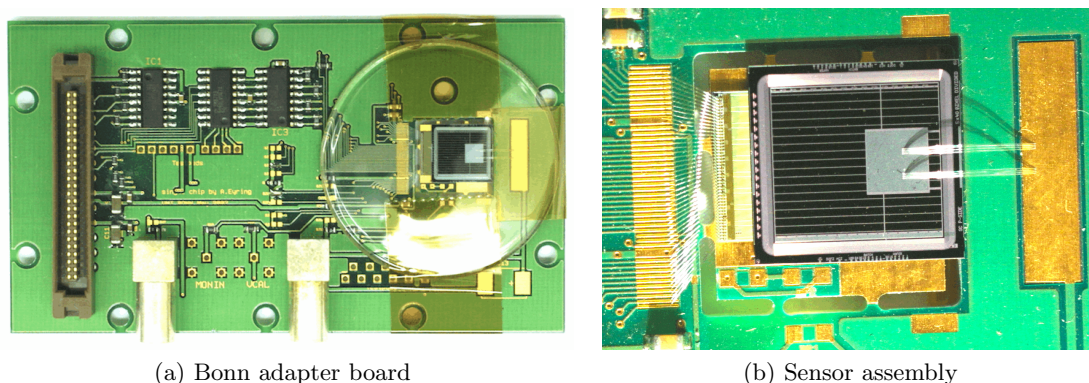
Photograph of a DUT. (a) shows a so called Bonn adapter board with an FE-I3 single chip assembly attached. (b) shows the sensor assembly attached to the PCB with wirebonds. Original taken from [81] and modified
